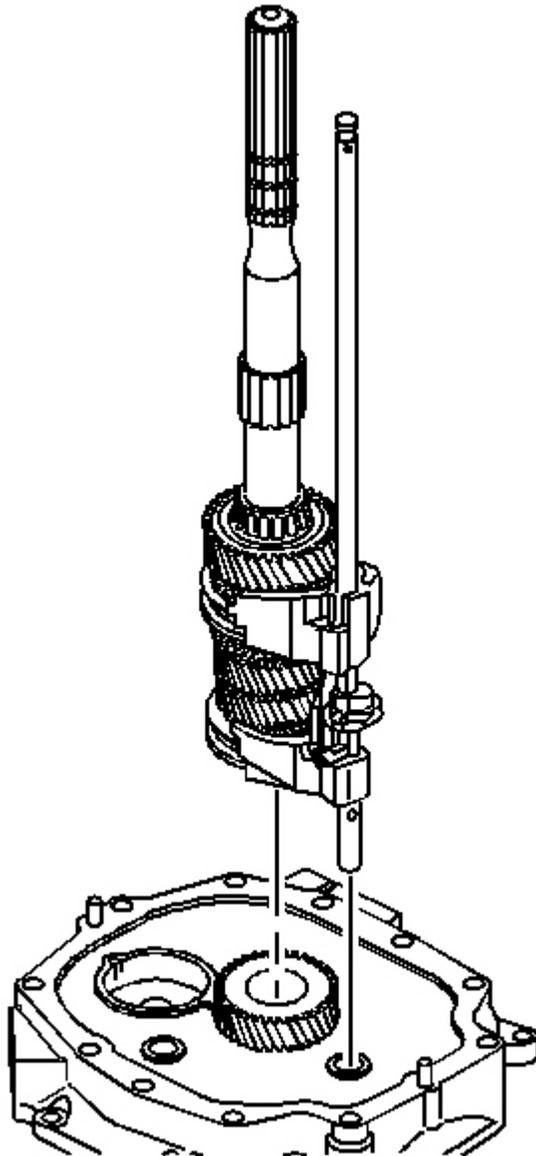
Installing/Removing Mainshaft & Shift Shaft Assembly
